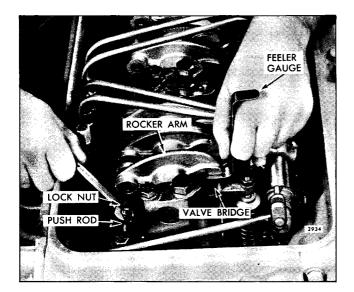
Adjusting Valve Clearance– Four Valve Cylinder Head
